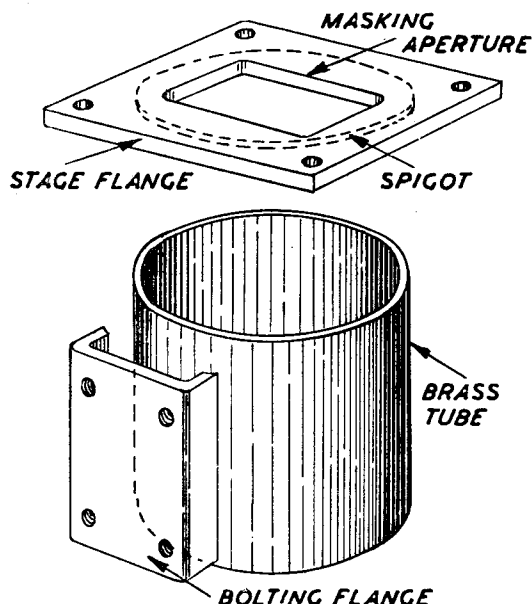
Method of building up the stage housing from tube and sheet brass. A similar method may be employed for the condenser housing.
